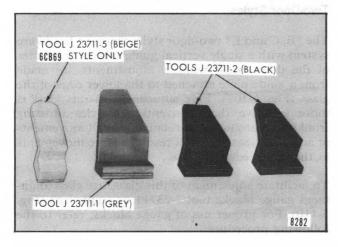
Glass Alignment Gauge Blocks - Tool J-23711 or Equivalent (Set of Four Blocks) - "B, C and E" Styles
